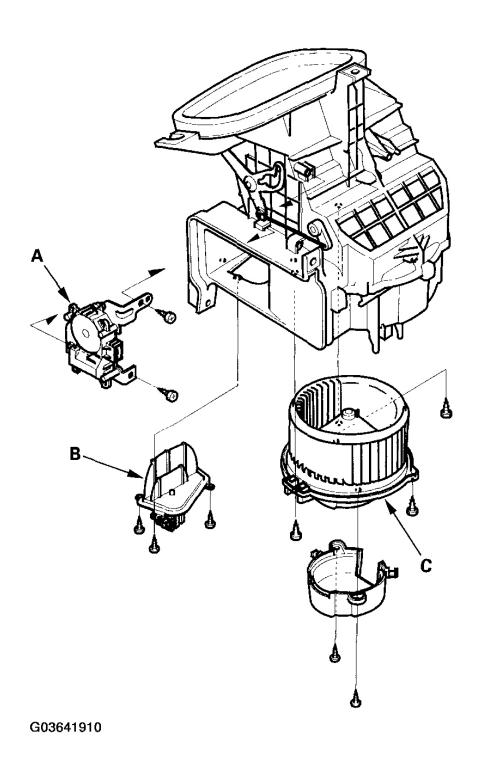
Removing Blower Unit Components Courtesy of AMERICAN HONDA MOTOR CO., INC.
